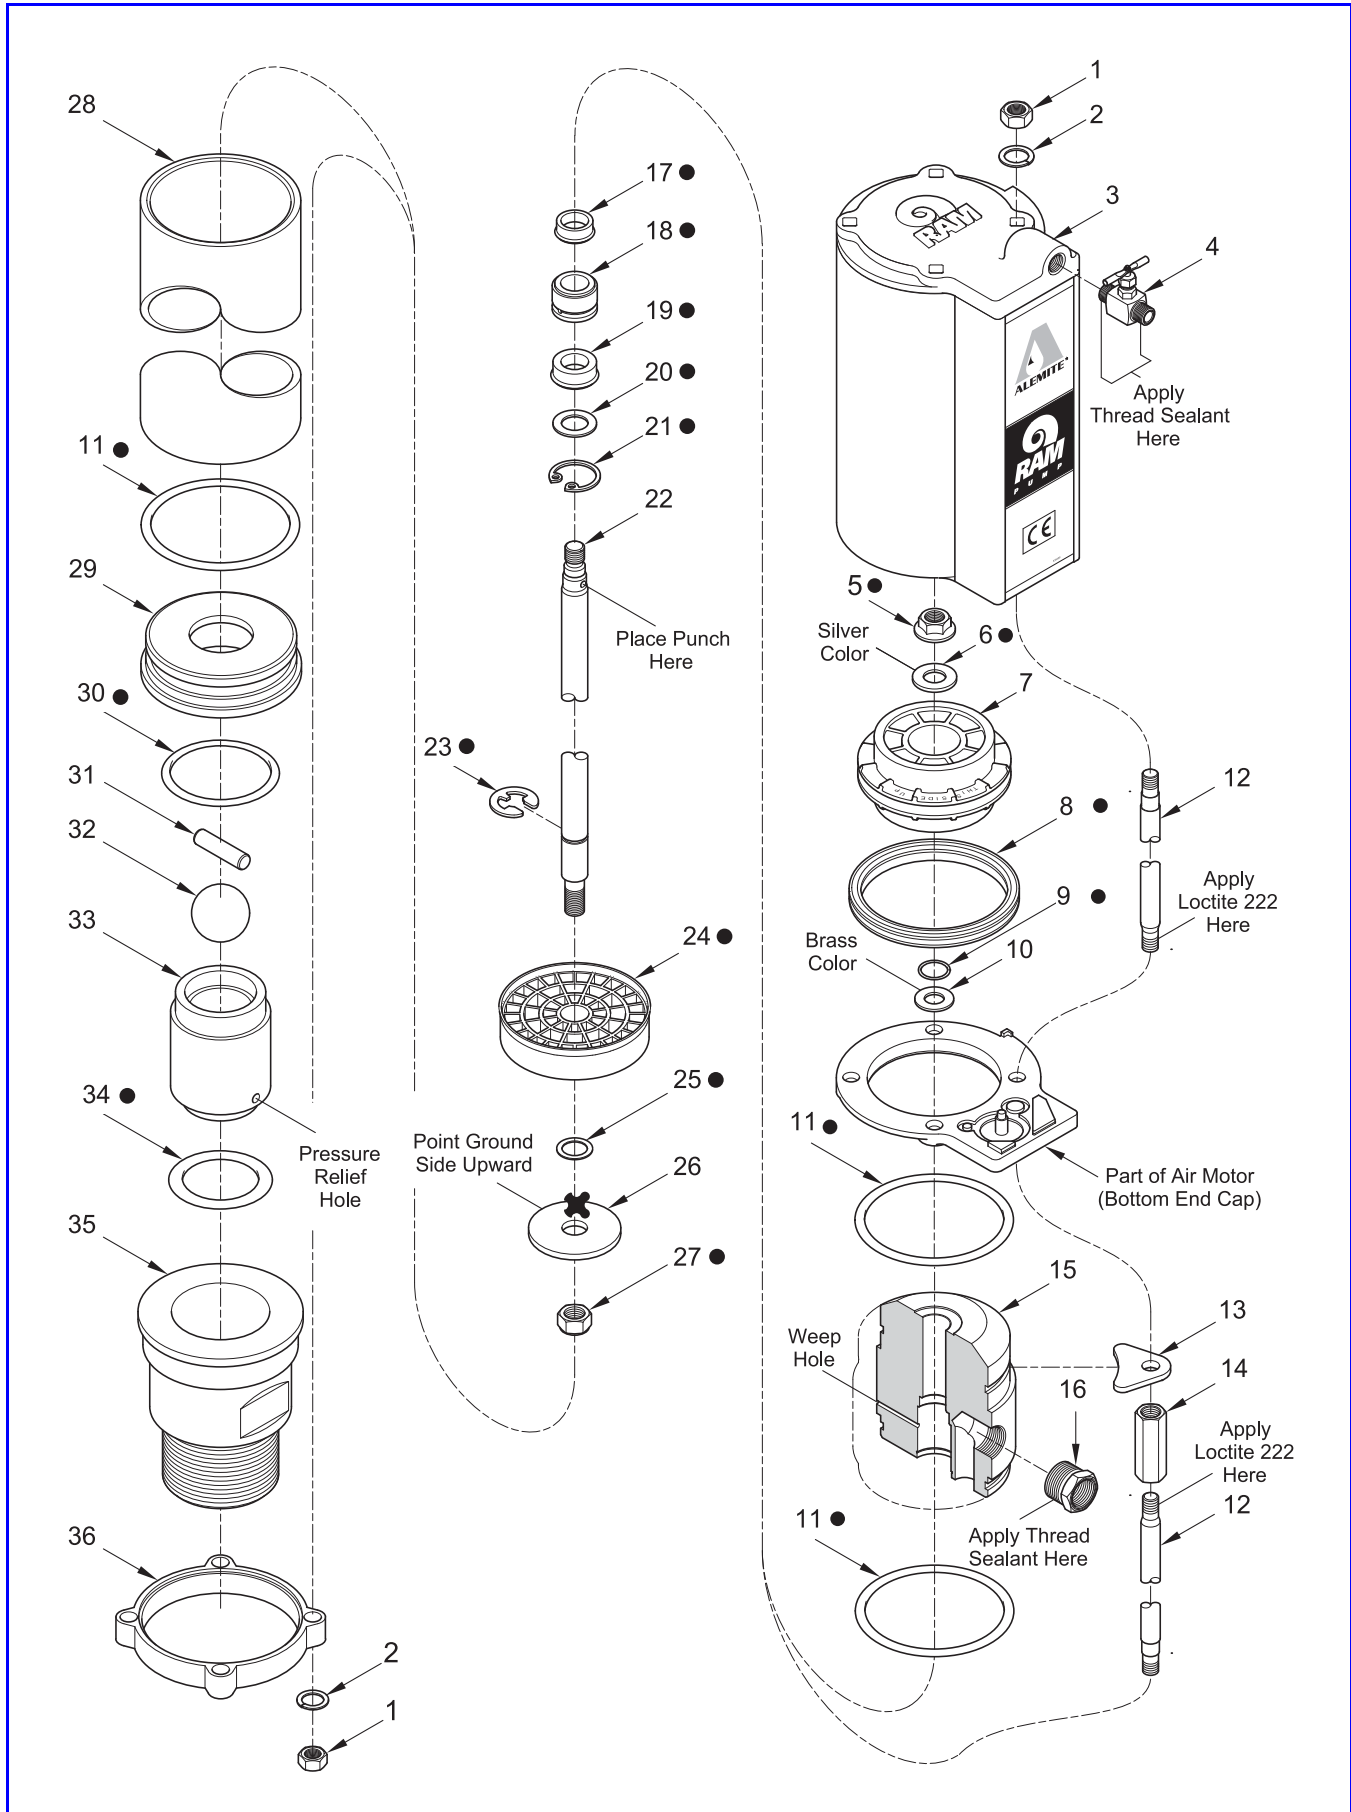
Low-Pressure Transfer Pump Model 9916-A - Exploded View
